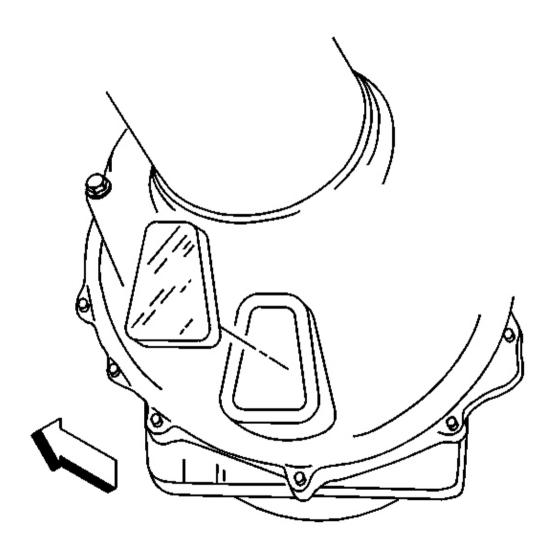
Driveline Support Assembly Access Plug Courtesy of GENERAL MOTORS CORP.
